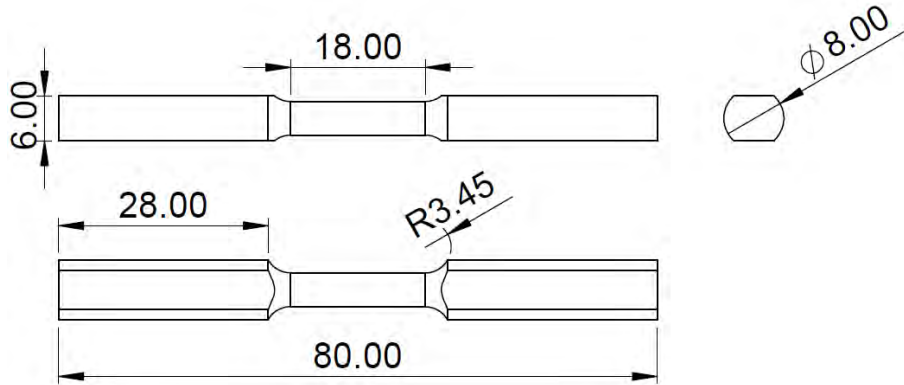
Specimen dimensions of the Bauschinger test samples, unit mm.
